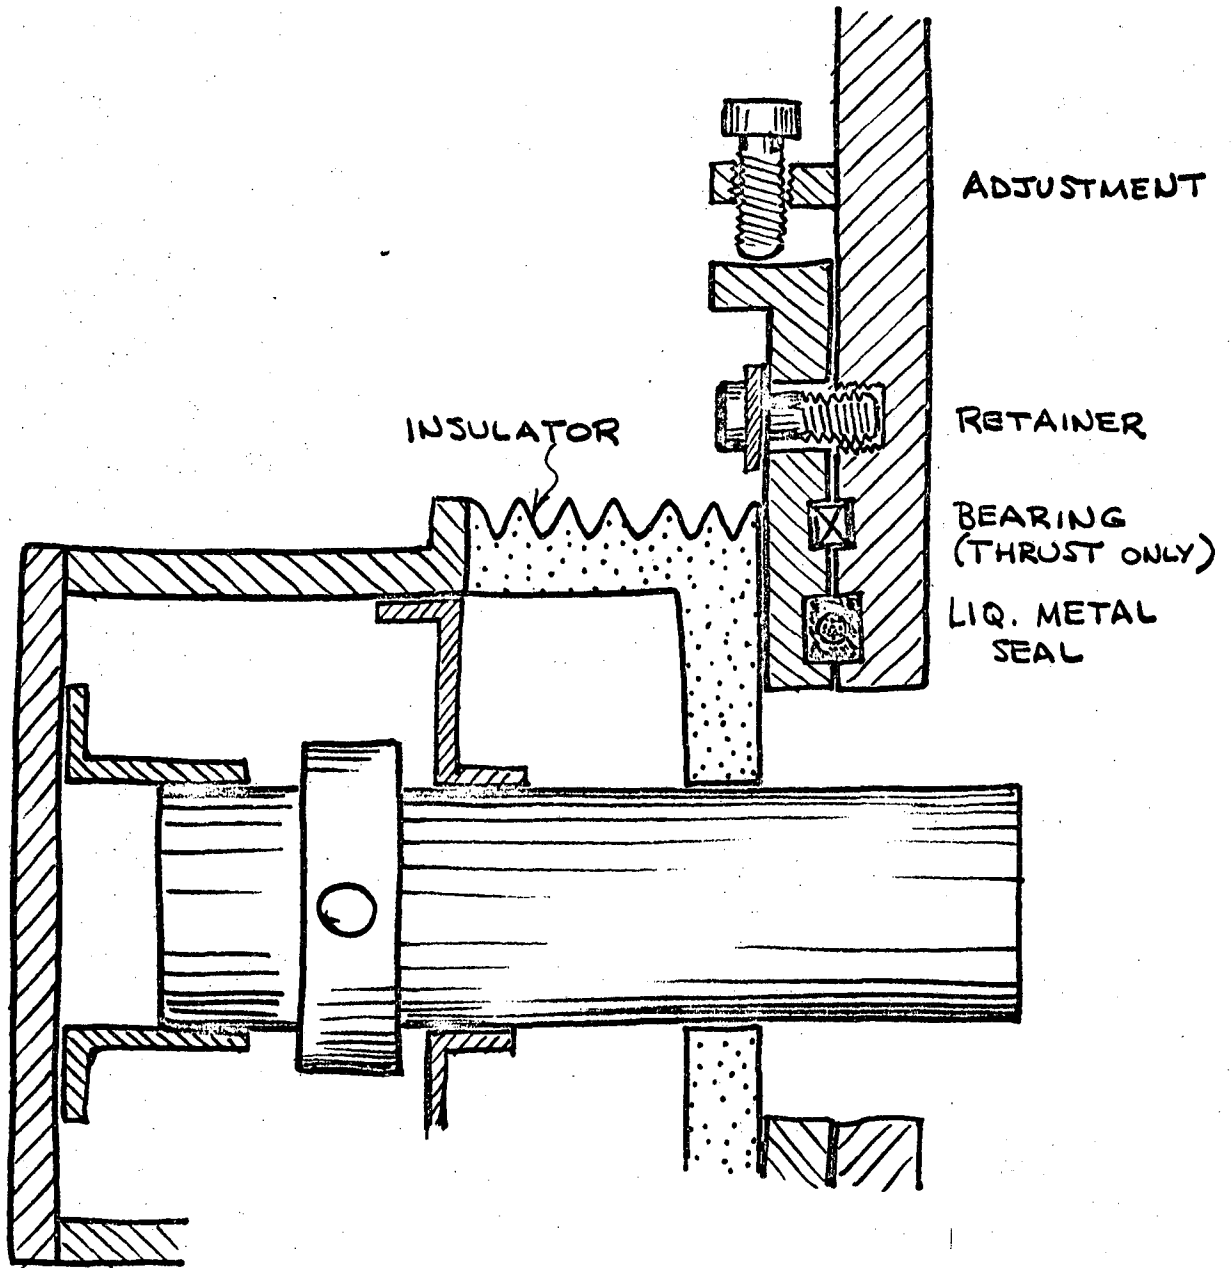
Design for an adjustable flange mount for a device such as an electron monochromator. The key element is a low melting point alloy metal seal.
